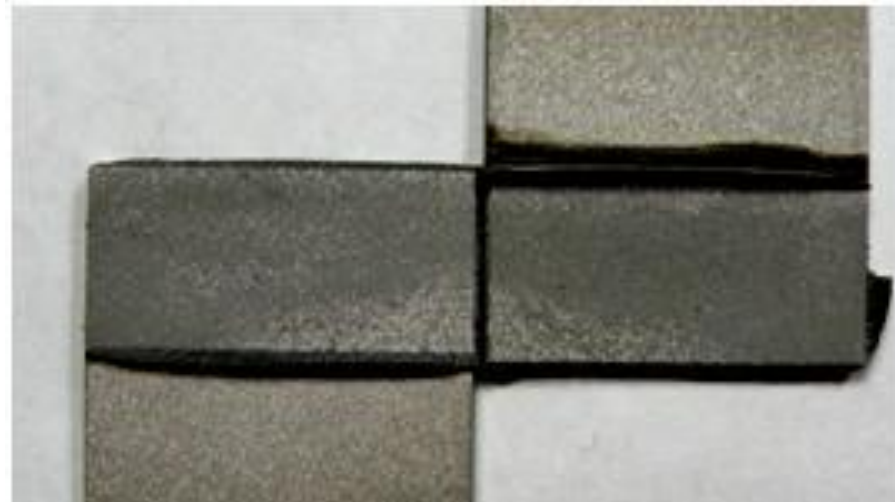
The fracture surfaces of the single -lap joint aged under 70°C and 75%RH at 5% load of the initial strength
